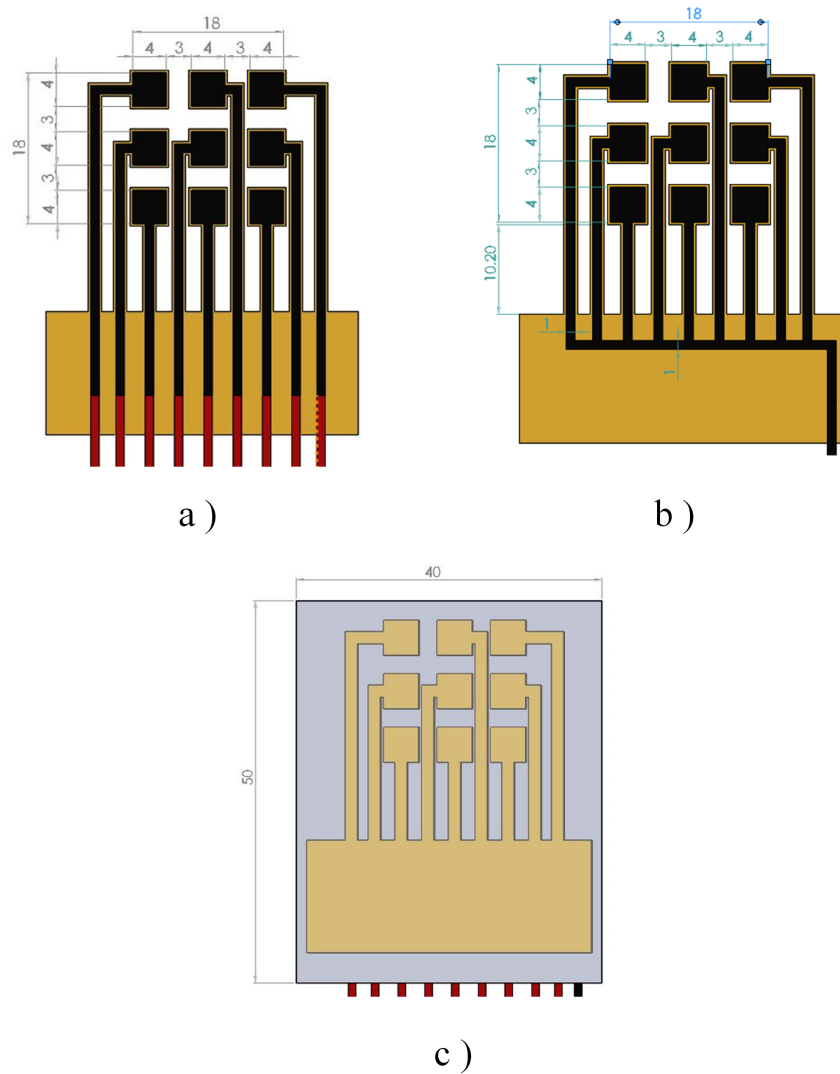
a) and b) dimensions of electrode layer. c) Final dimension of tactile sensor [mm].
